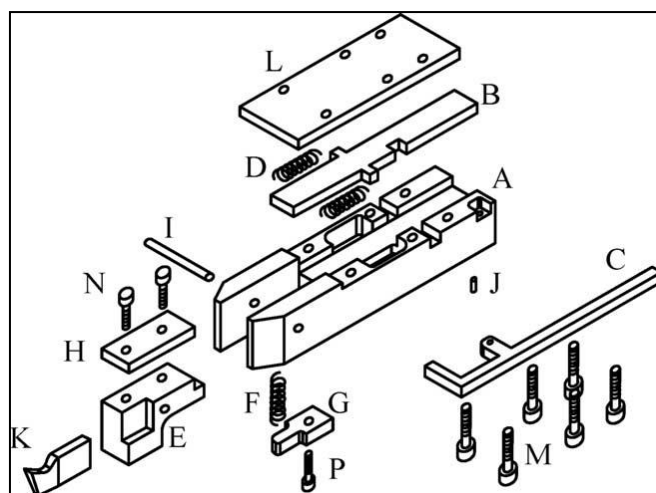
Exploded model of the QSD developed by Chern [45].
